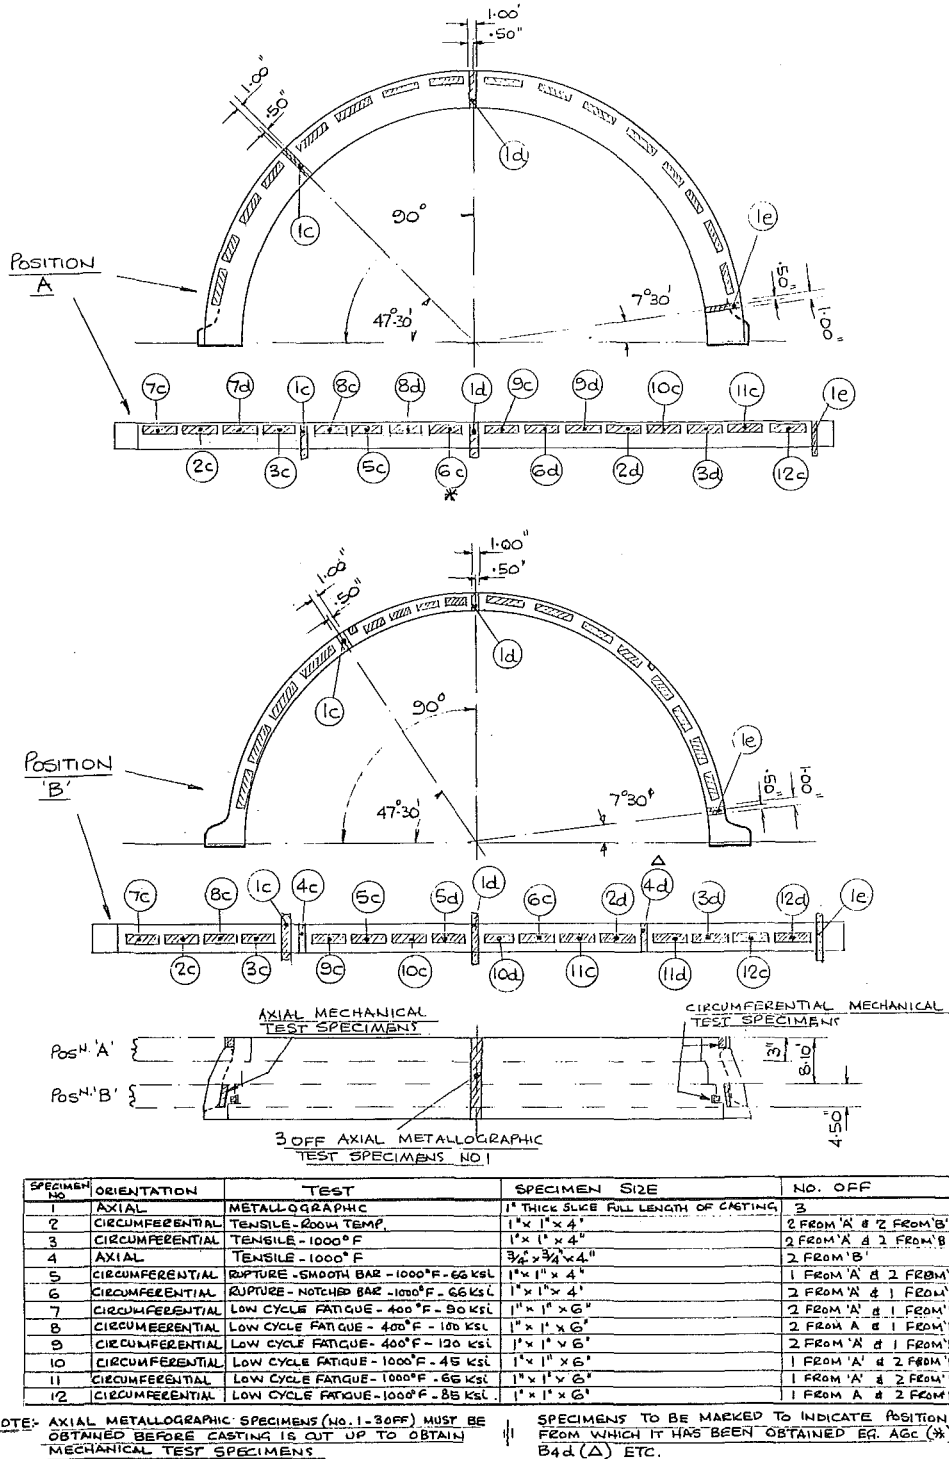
Cut-up tests on FV507 centrifuged outer casing
